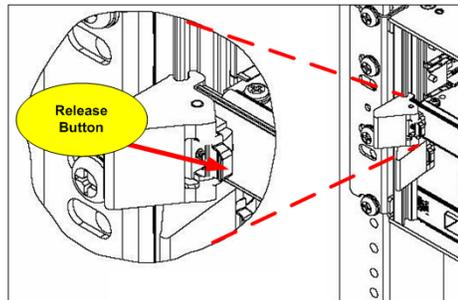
Latch in the Out Position (Release Button has been Engaged)
